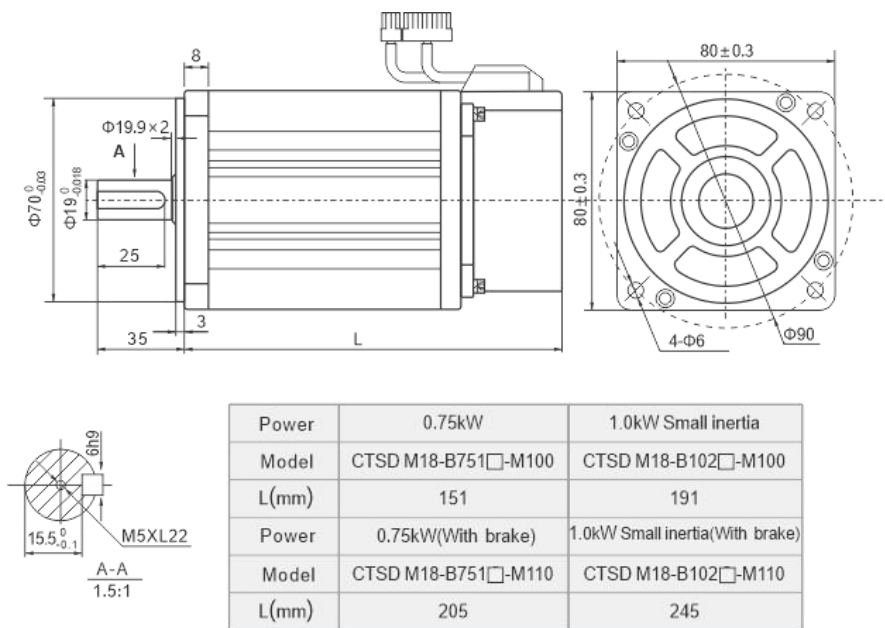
Motor dimension of 0.75kW/1.0kW
